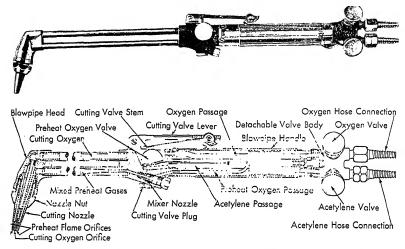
Typical medium pressure cutting blowpipe (Prest-O-Weld) and schematic cross-section.
